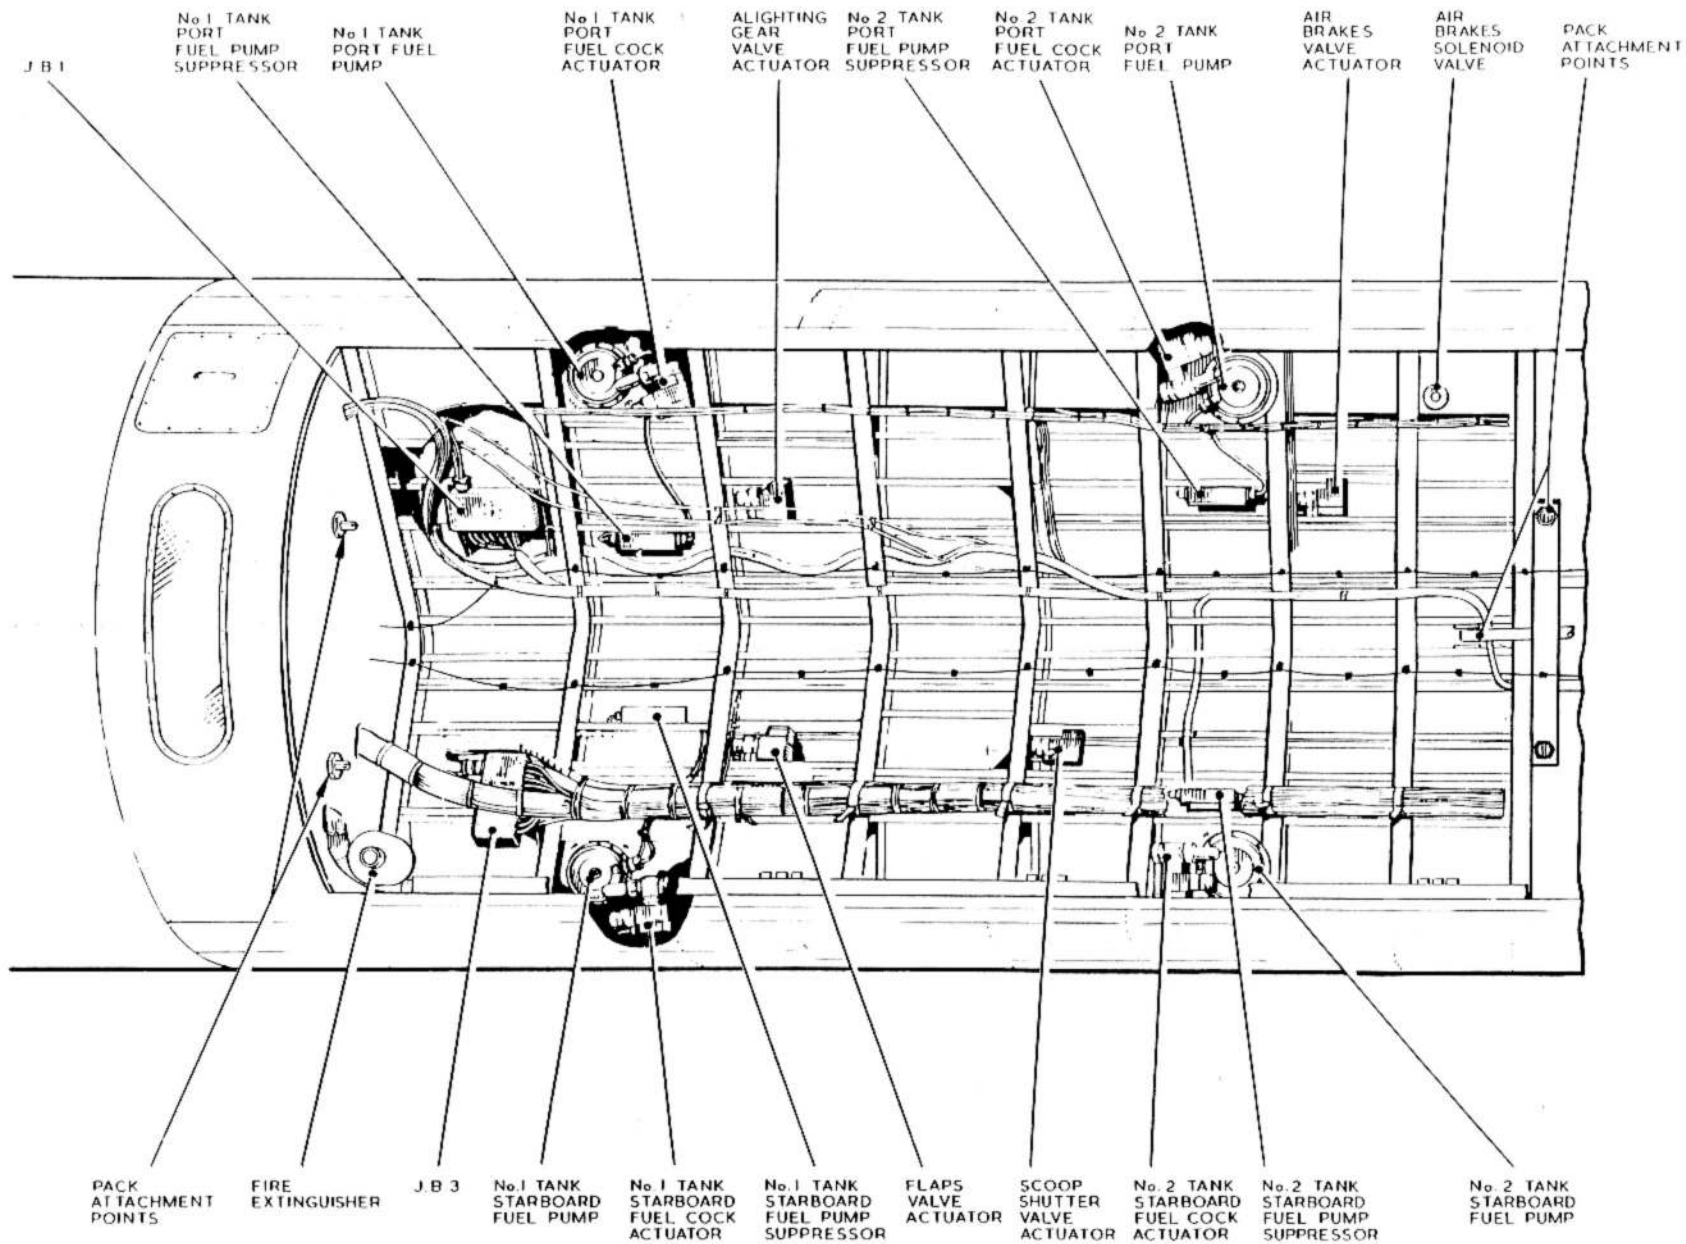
ELECTRICAL INSTALLATION - PACK BAY
